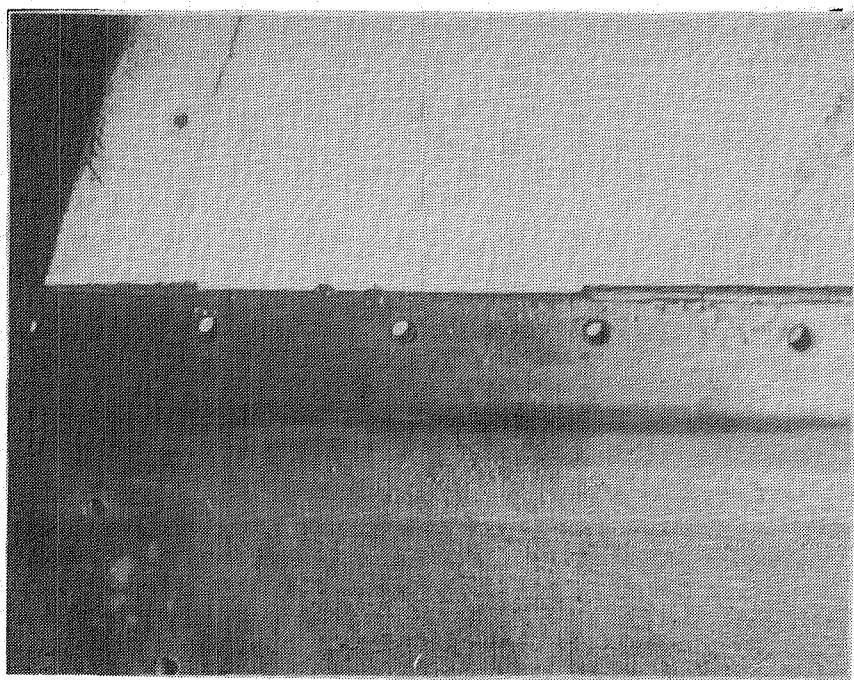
TWA Right-Hand Aft Engine Fairing - Fastener
